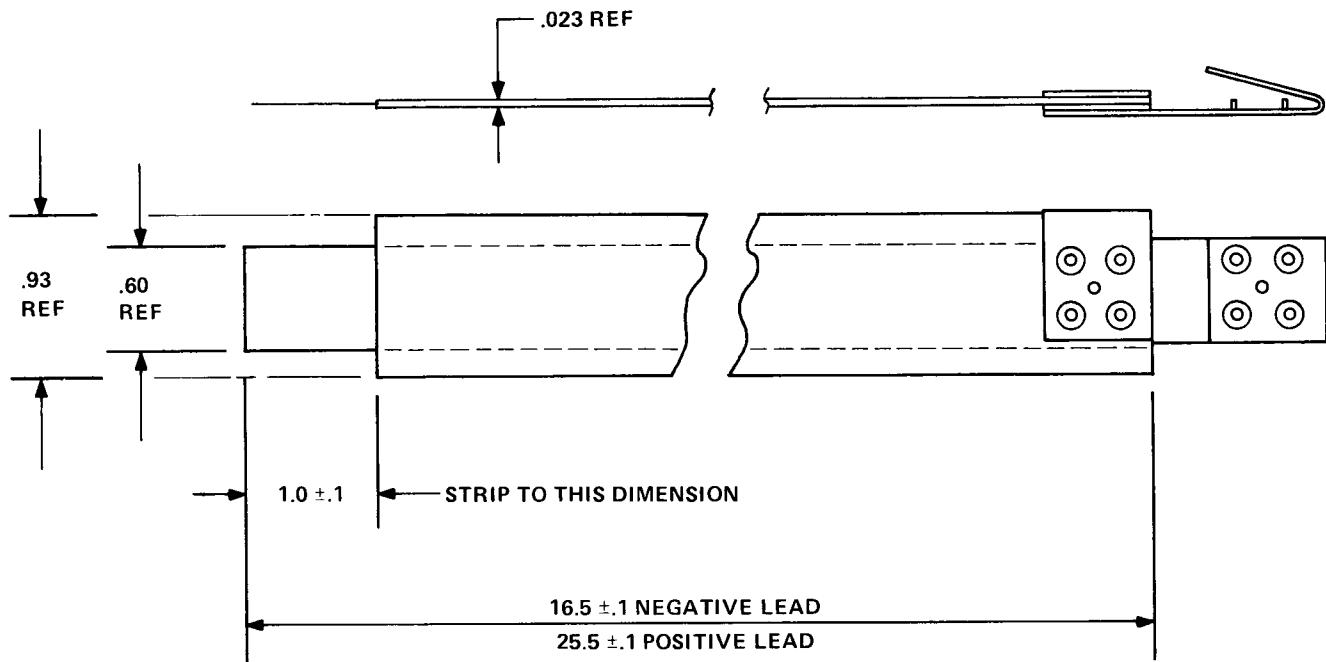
AMP, Inc. Flat Conductor Cable Assembly
